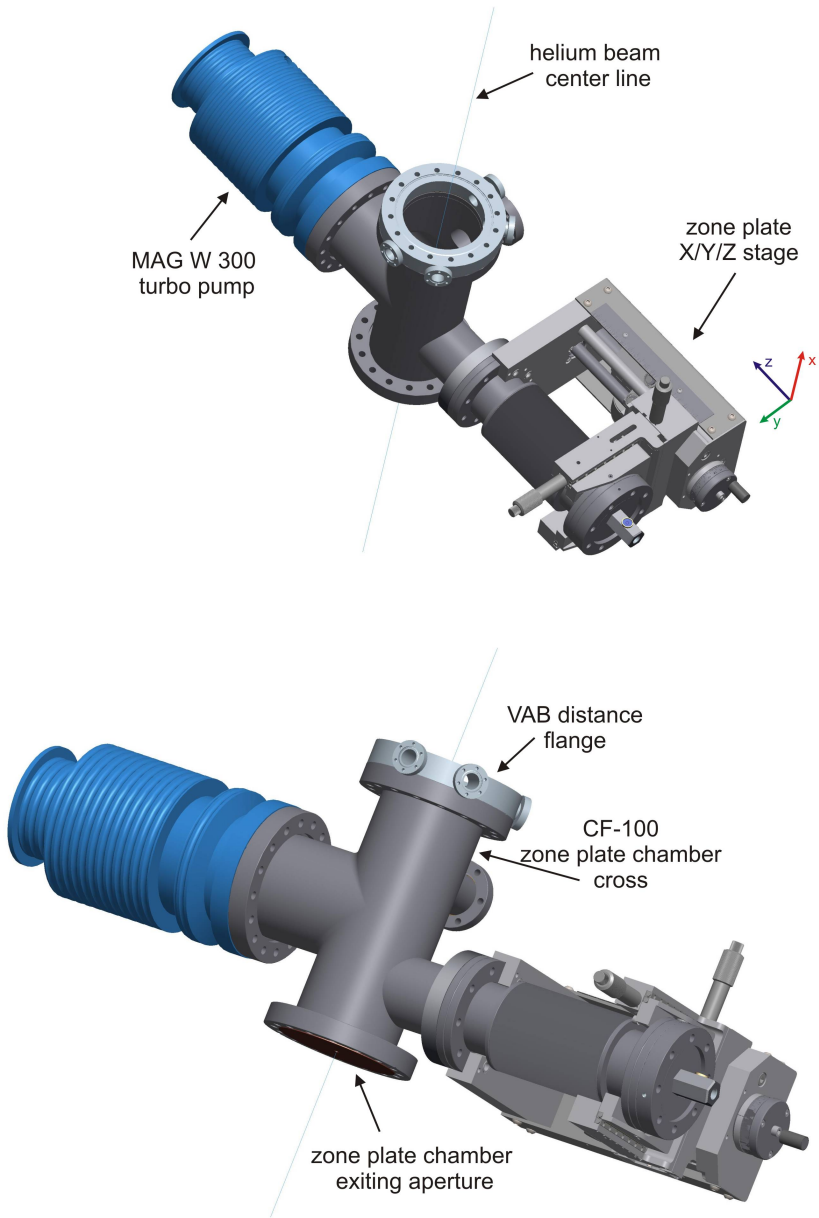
Assembly sketch of the *zone plate chamber* with a mounted *zone plate holder* attached to the UHV X/Y/Z stage as well as with a mounted MAG W 300 turbo pump presented with different view directions (top, bottom).
